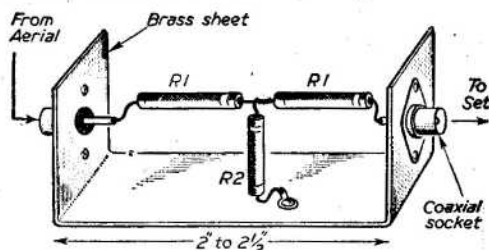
Practical design for a single attenuator section. A cover should be made to fit over the assembly.
